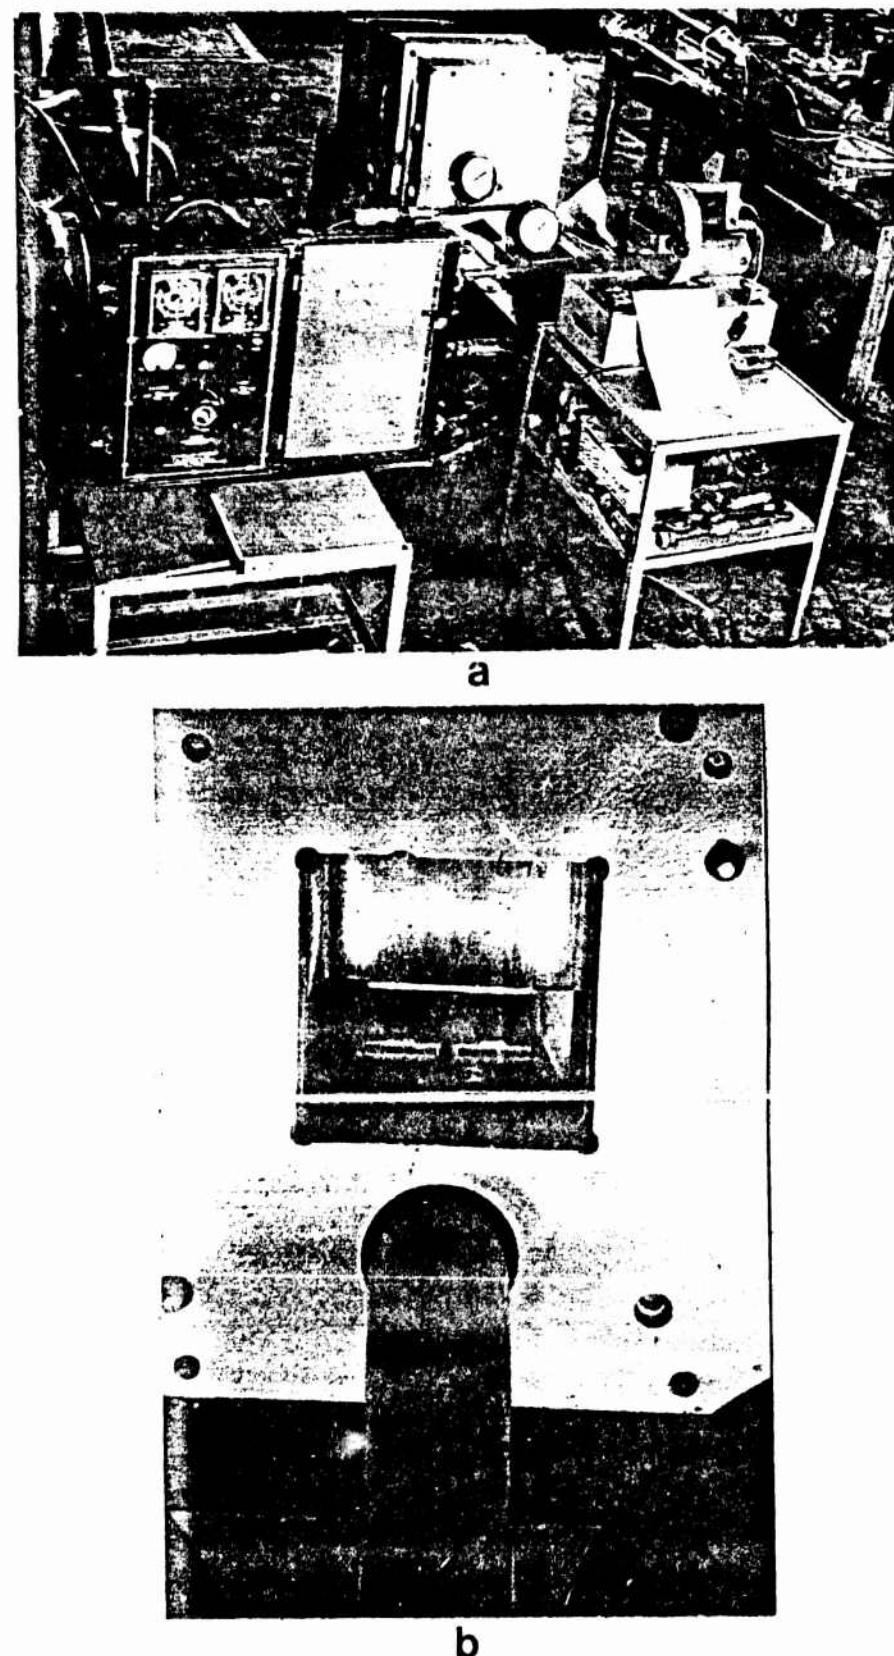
Photographs of the transparent casting machine used to study the die filling behavior of low temperature liquids and semi-solid mixtures. Top: overall view including casting machine, high speed movie camera, and power supply. Bottom: close view showing cavity design, transparent window and hot sleeve.
